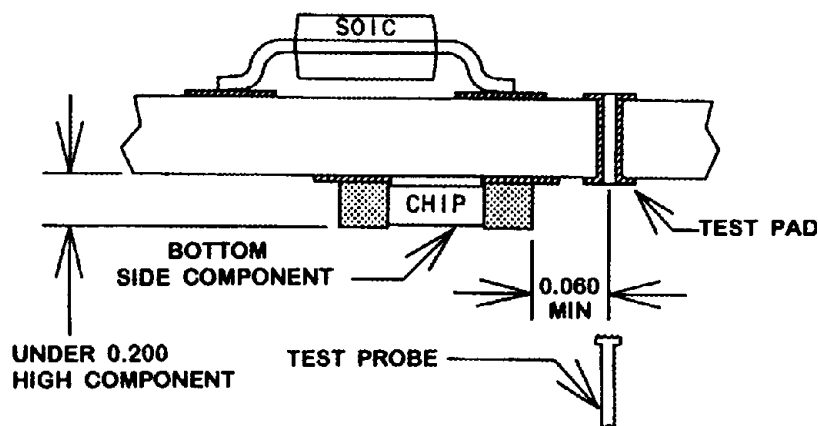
TEST PAD TO COMPONENT SPACING (COMPONENTS UNDER .200" HIGH)
